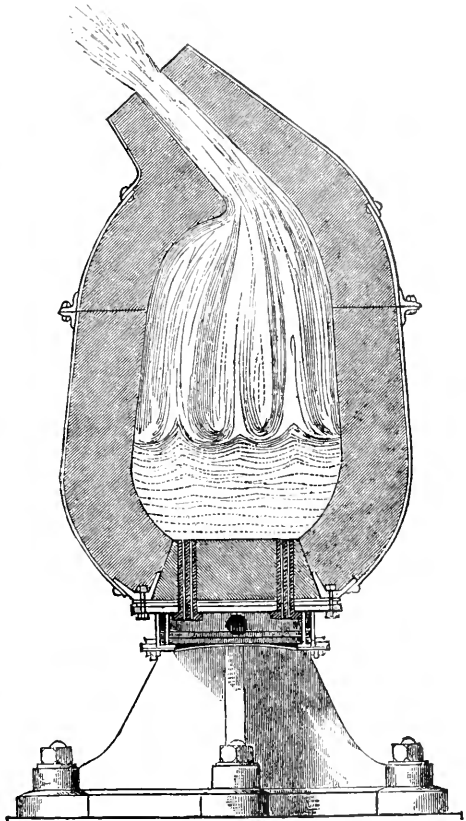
SECTION OF A BESSEMER CONVERTER.
